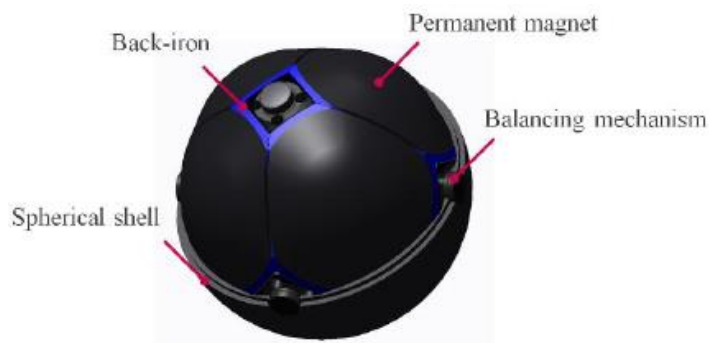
Elegant breadboard Rotor Assembly (Rossini, et al., 2017)
